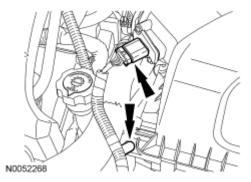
Locating Engine Breather Courtesy of FORD MOTOR CO.
